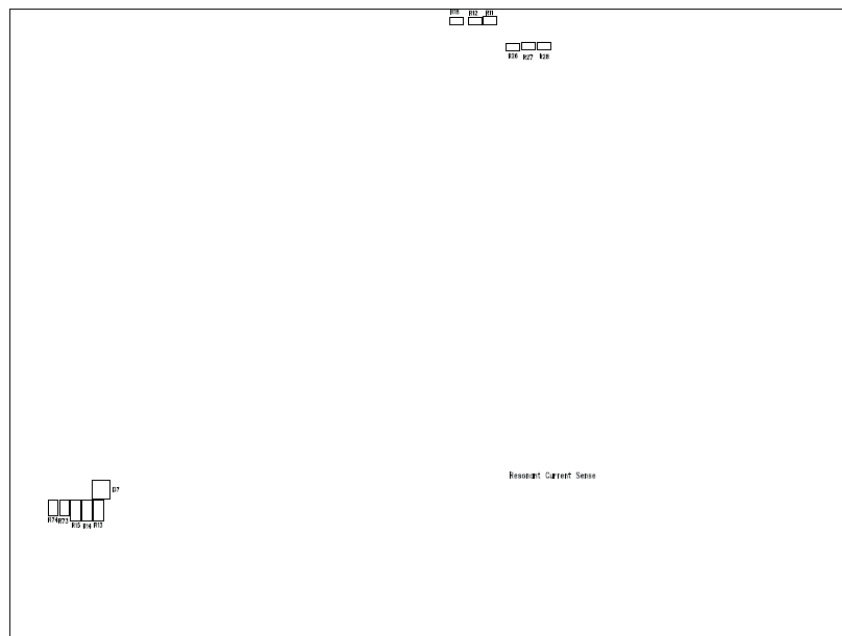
UCD3138LLCEVM-028 Bottom Assembly Drawing (bottom view)
